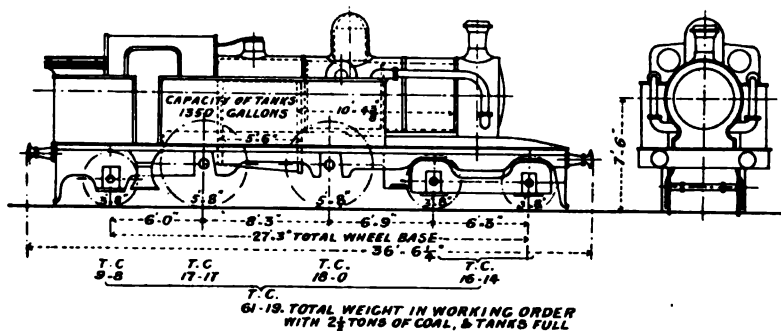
G.N.R. Ten-wheeled Side Tank Engine. (Cylinders, 18 in. by 26 in. stroke.)
